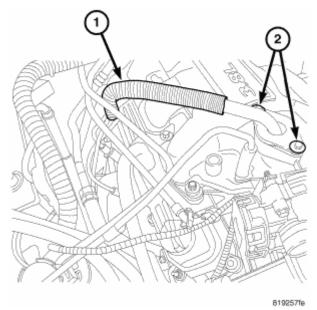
EGR Tube Flange Courtesy of CHRYSLER LLC
